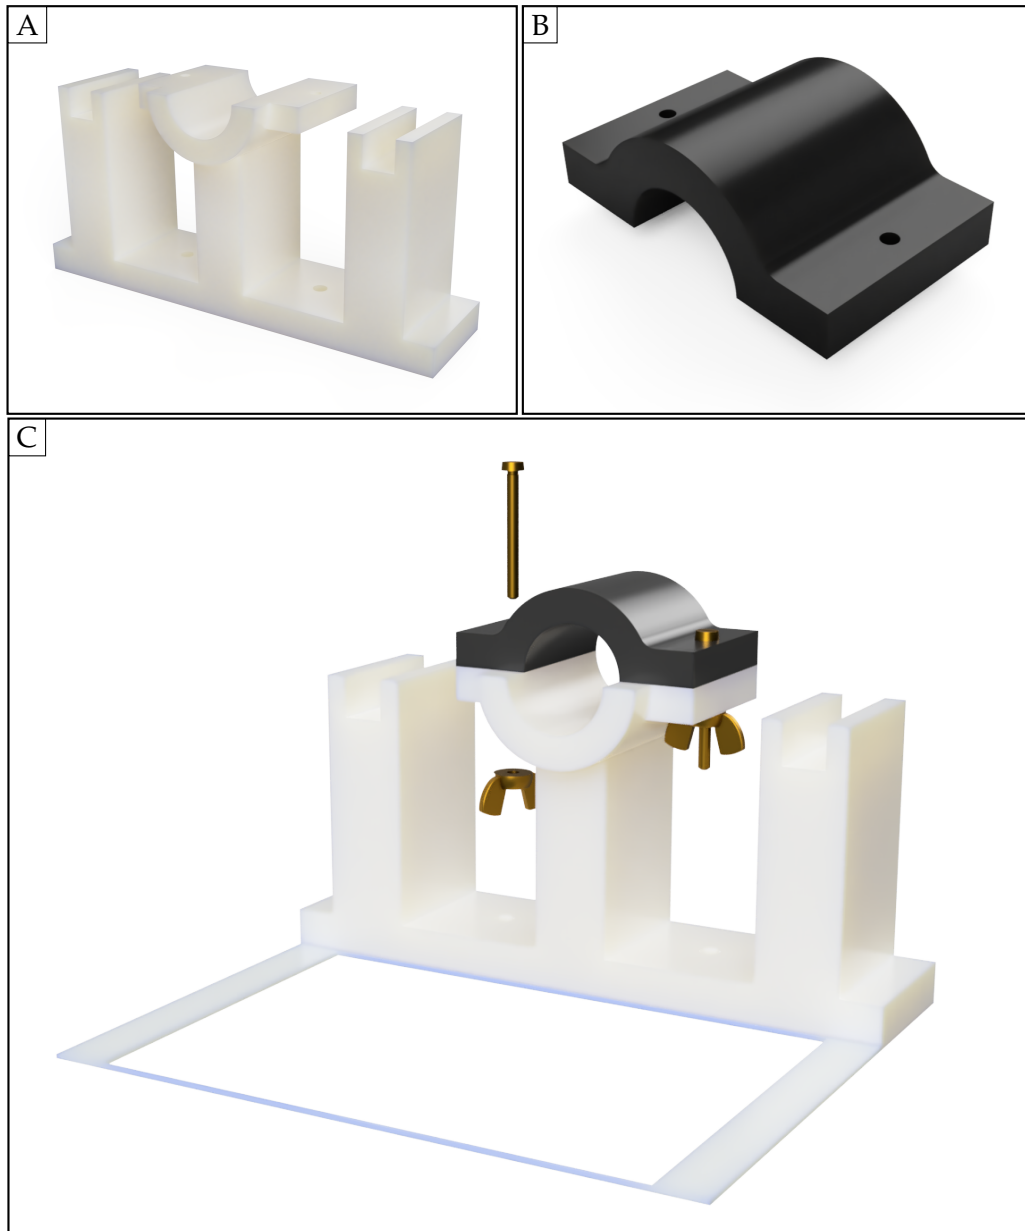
A) Engine support; B) Engine locker; C) Mounting of the support and the locker.
